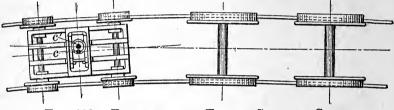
FOUR-WHEELED TRUCK-SHIFTING CENTER.
